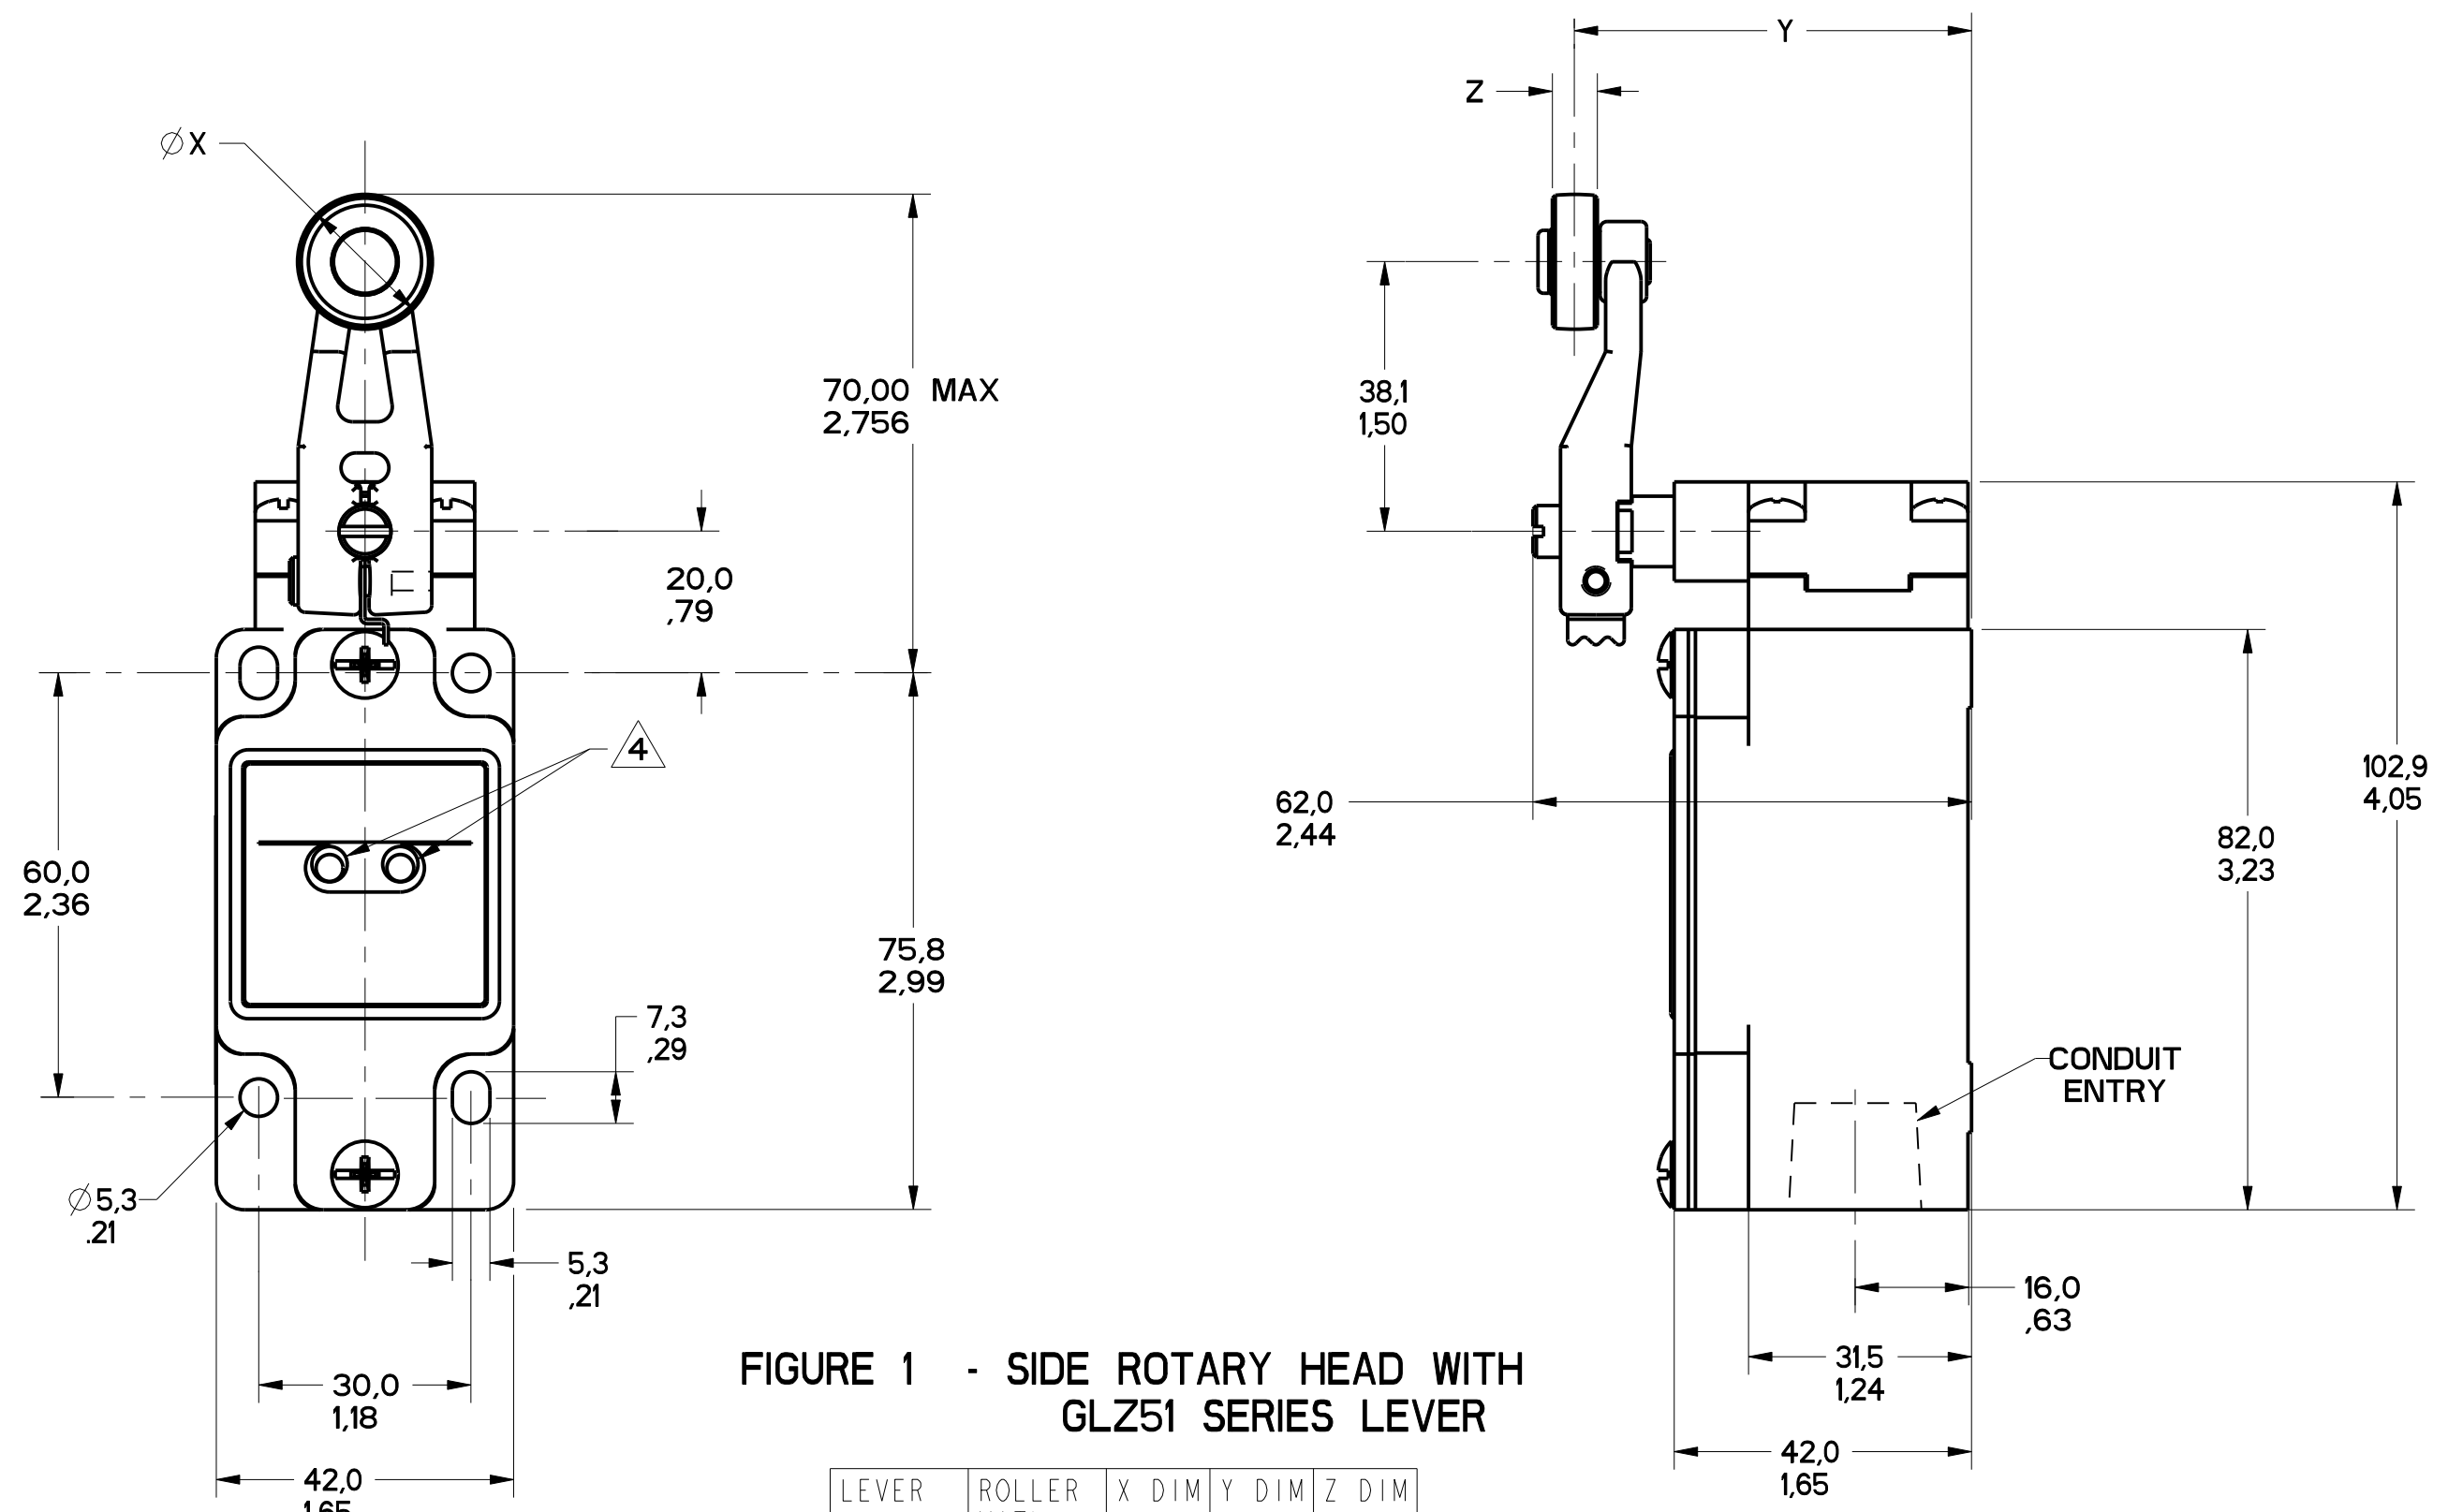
SIDE ROTARY HEAD WITH GLZ51 SERIES LEVER
